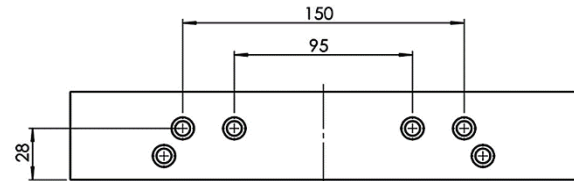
Adding new cooling channels (fixed mould plate) [6]
